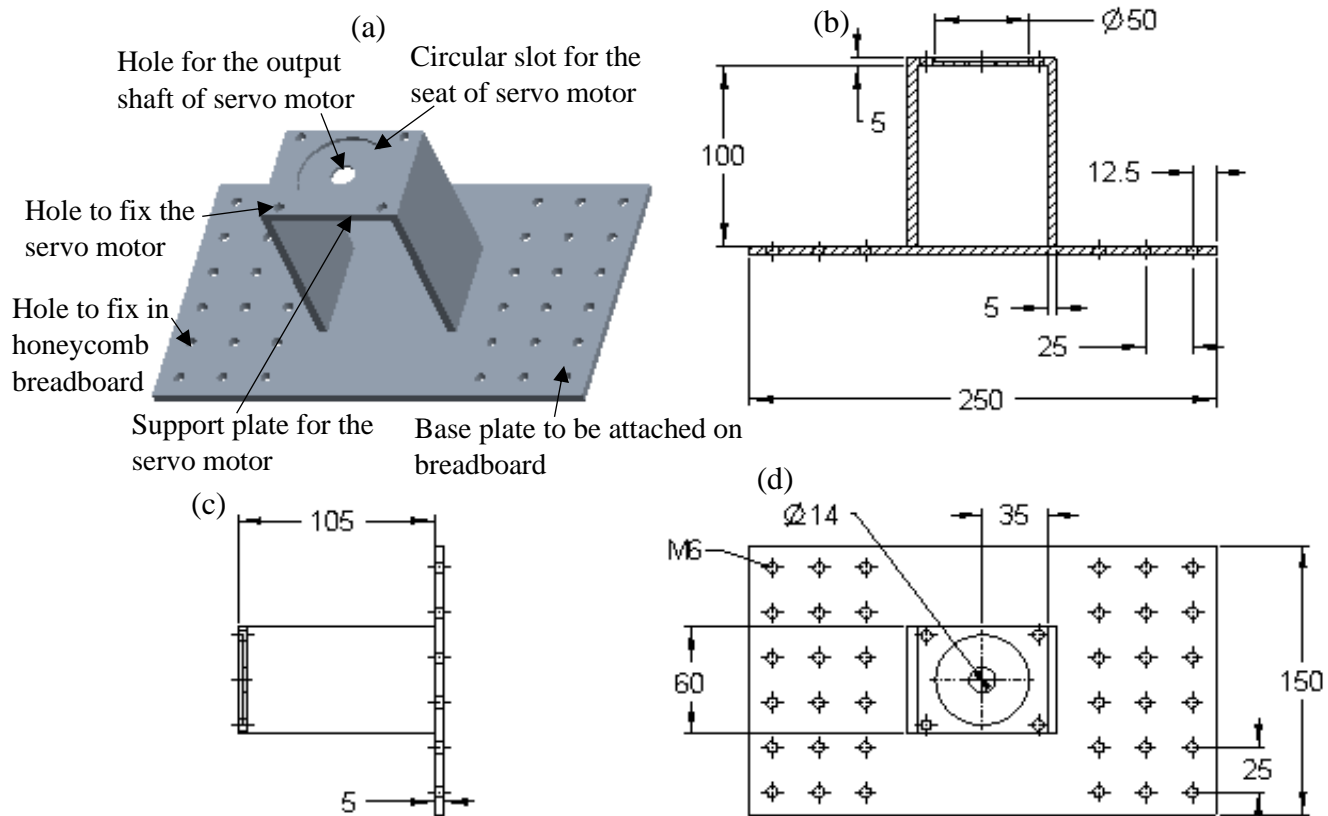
(a) Three-dimensional CAD model, (b) sectional front view, (c) projected side view, and (d) projected top view of the fixture for mounting the workpiece rotating servo motor.
